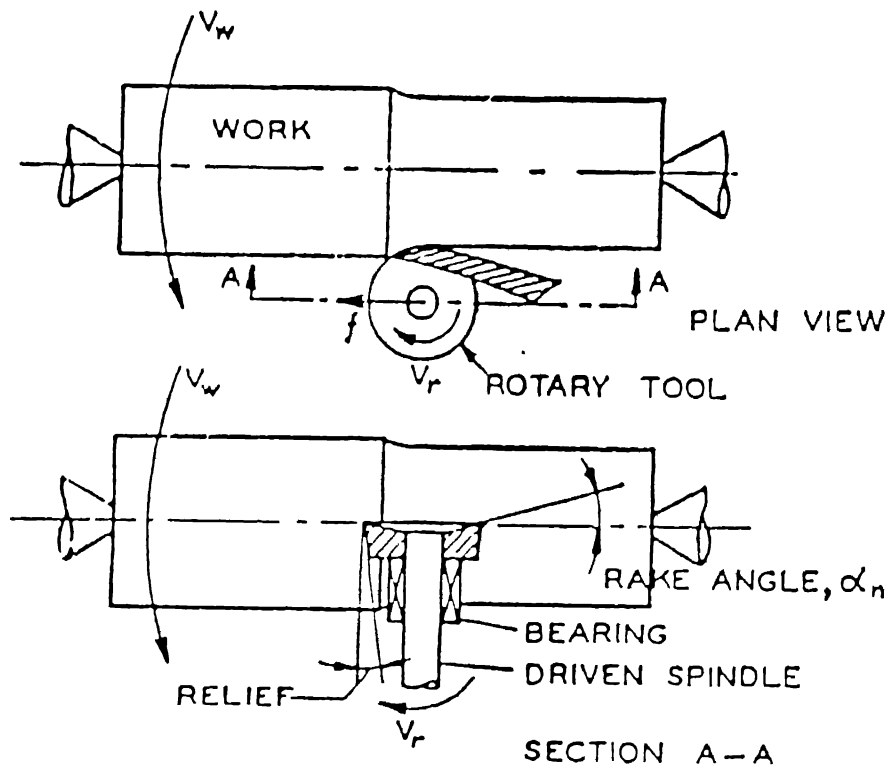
Rotary tool shown in use in rough turning operation
